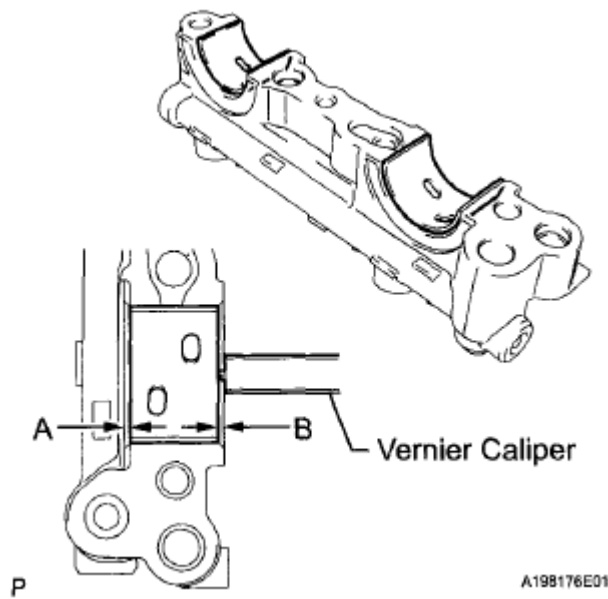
Measuring Distance Between Camshaft Bearing Cap Edge And Camshaft Bearing Edge
